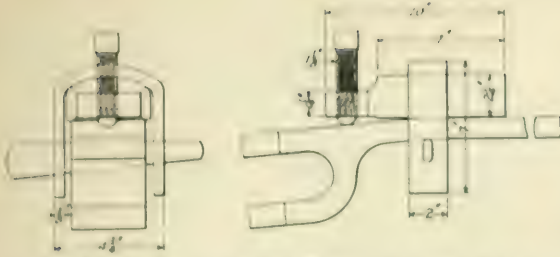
Device for Bending Eccentric Blades, Brake Levers, Etc.
